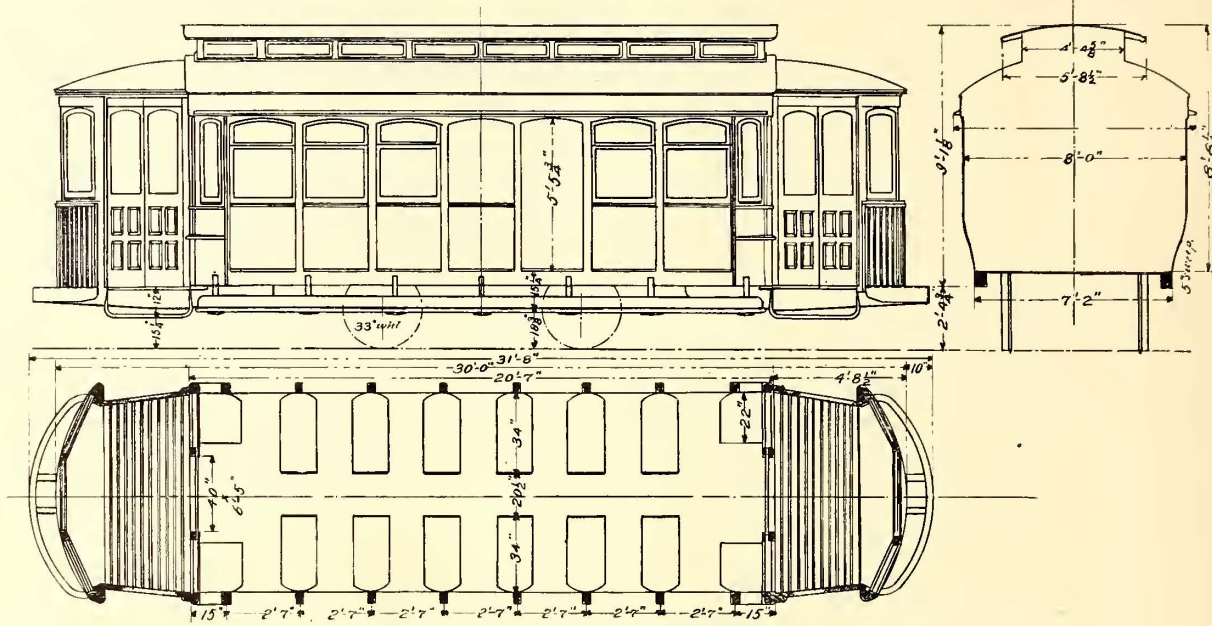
PLAN, SIDE ELEVATION AND END ELEVATION OF STANDARD SINGLE-TRUCK CONVERTIBLE CAR
